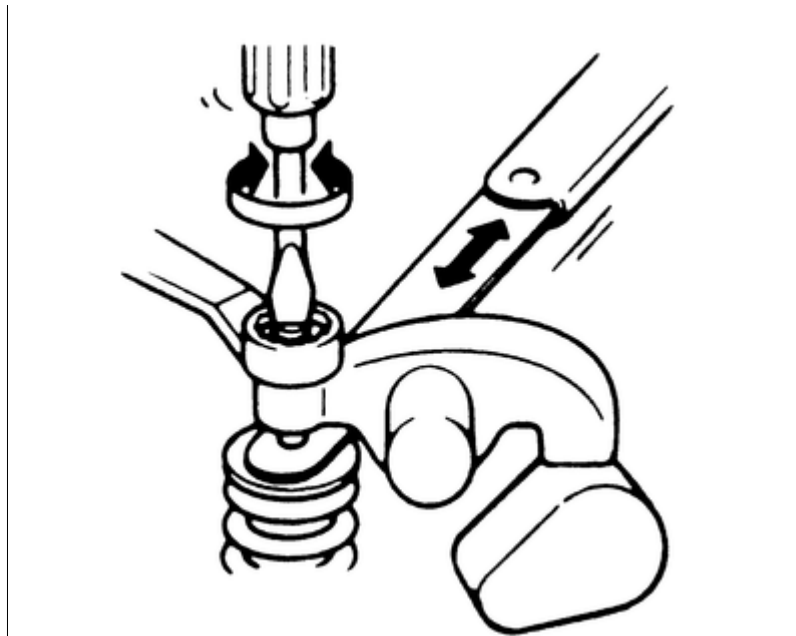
Loosen the lock-nut and turn the adjusting screw to adjust the valve clearance — Z24i engine
